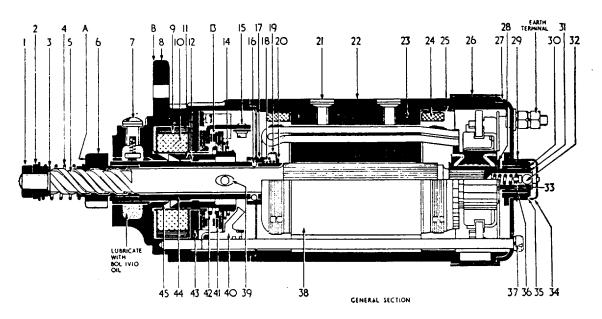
Cross Section view of CA 45 Type Starter Motor.
